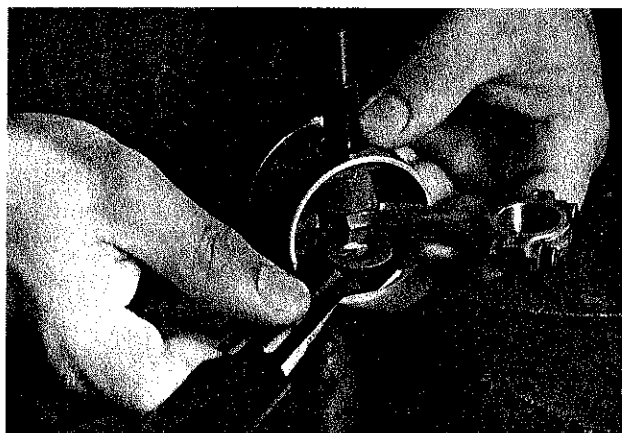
Using an inserter tool to line up the thrust washers makes it easier to properly align connecting rod, washers, and piston and to press the piston pin into position.
